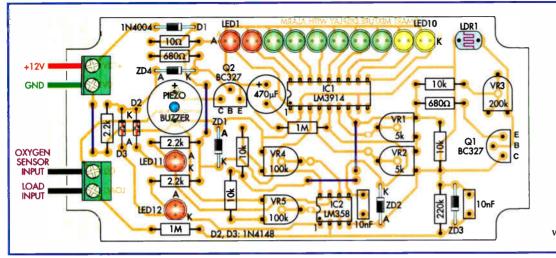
this diagram shows where each of the components is placed on the main PC board. Use this diagram, the photos of the completed board, Fig.1 and the parts list to help you assemble it correctly.
